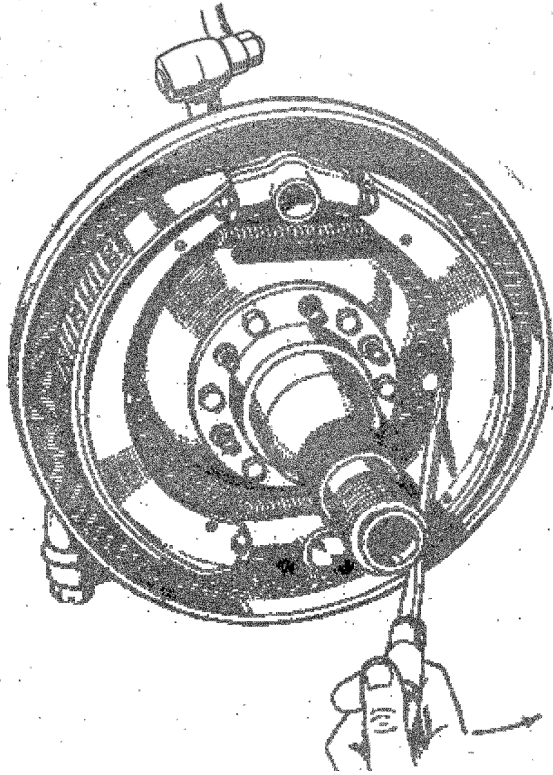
THIS ILLUSTRATION SHOWS HOW EASY IT IS TO REMOVE A GIRLING BRAKE SHOE BY MEANS OF A LARGE SCREWDRIVER. (See text.)
